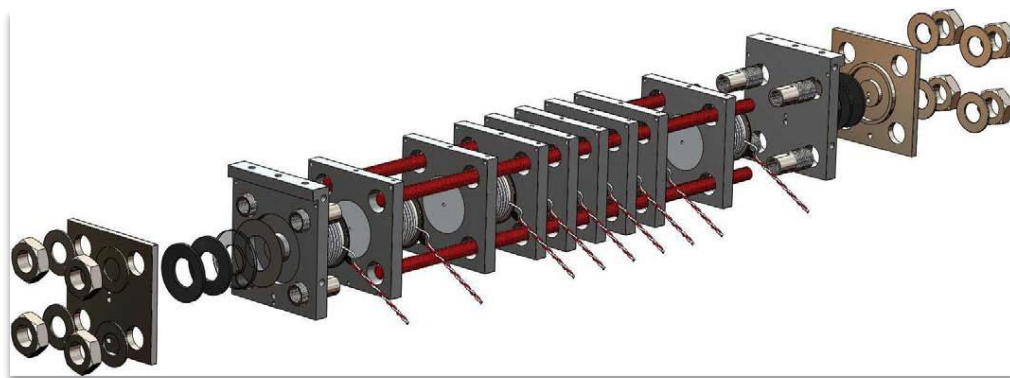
Clamps, Rods, Heatsinks, and other Mechanical Components for Stack-Assemblies
